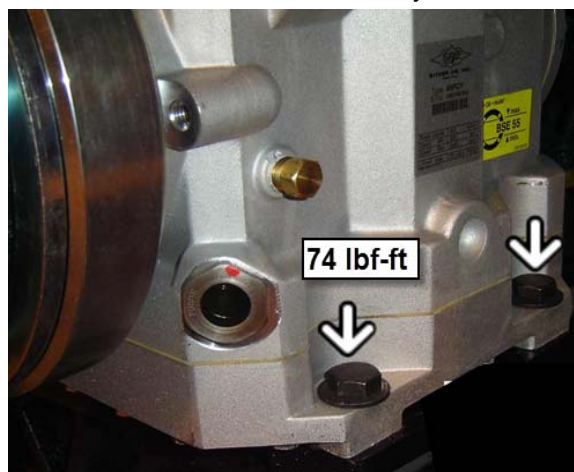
MOUNTING BOLTS TORQUE – 4 BOLTS
